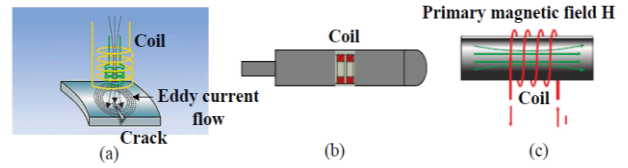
Typical EC probes: (a) Pancake type coil, (b) Bobbin type coil, (c) Encircling type coil.
